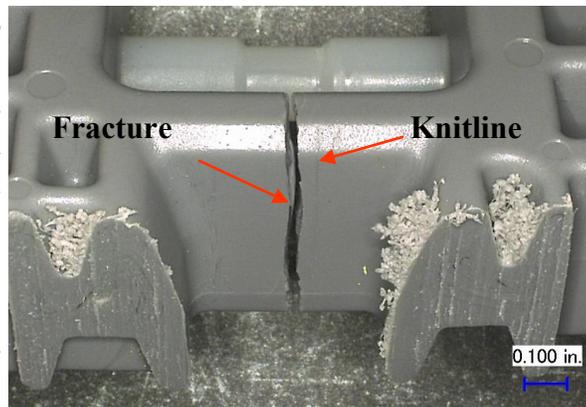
View of the fracture location in the part produced from a gray masterbatch resin.
